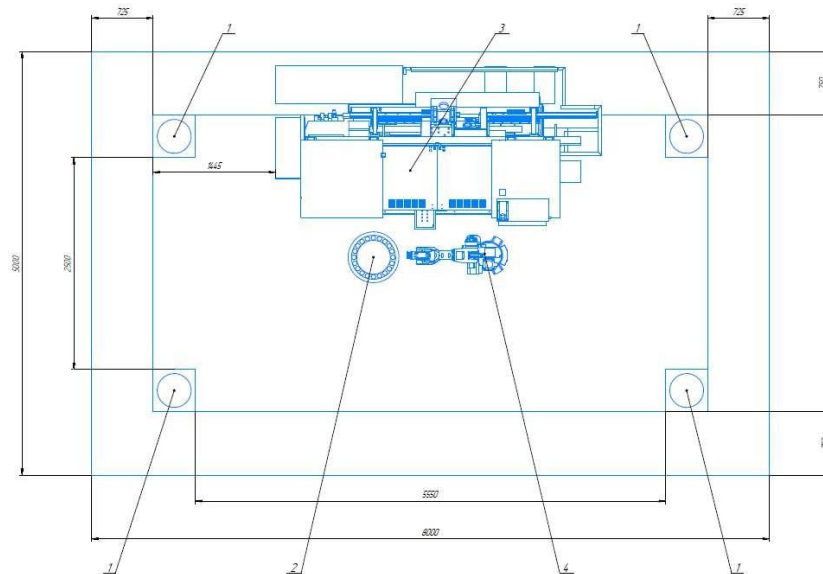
Sketch of the layout of a robotic complex for the manufacture of parts for construction 1 - columns with sensors; 2 - storage device; 3 - machine; 4 - industrial robot
